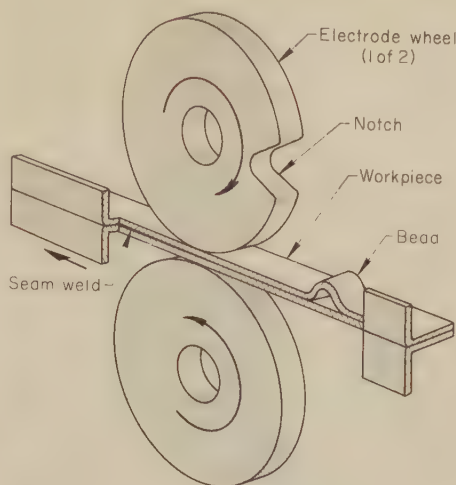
Use of a notched electrode wheel for seam welding of a workpiece having beads (or other obstructions) in the path of the wheel (see also Fig. 11)
